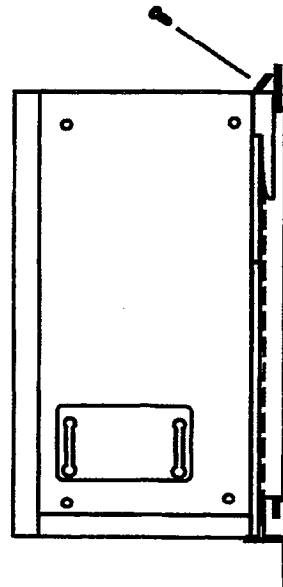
Securing the KSU to the Wall Mount Bracket
